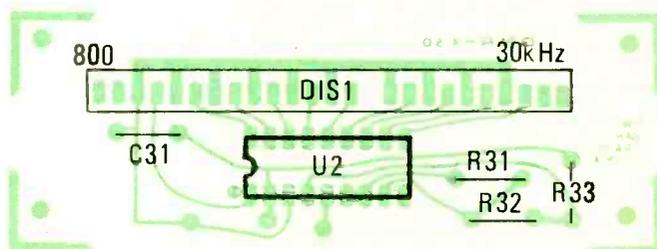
PARTS LOCATION on x-ray view of bar-graph display printed-circuit board which mounts on DNR front panel.
